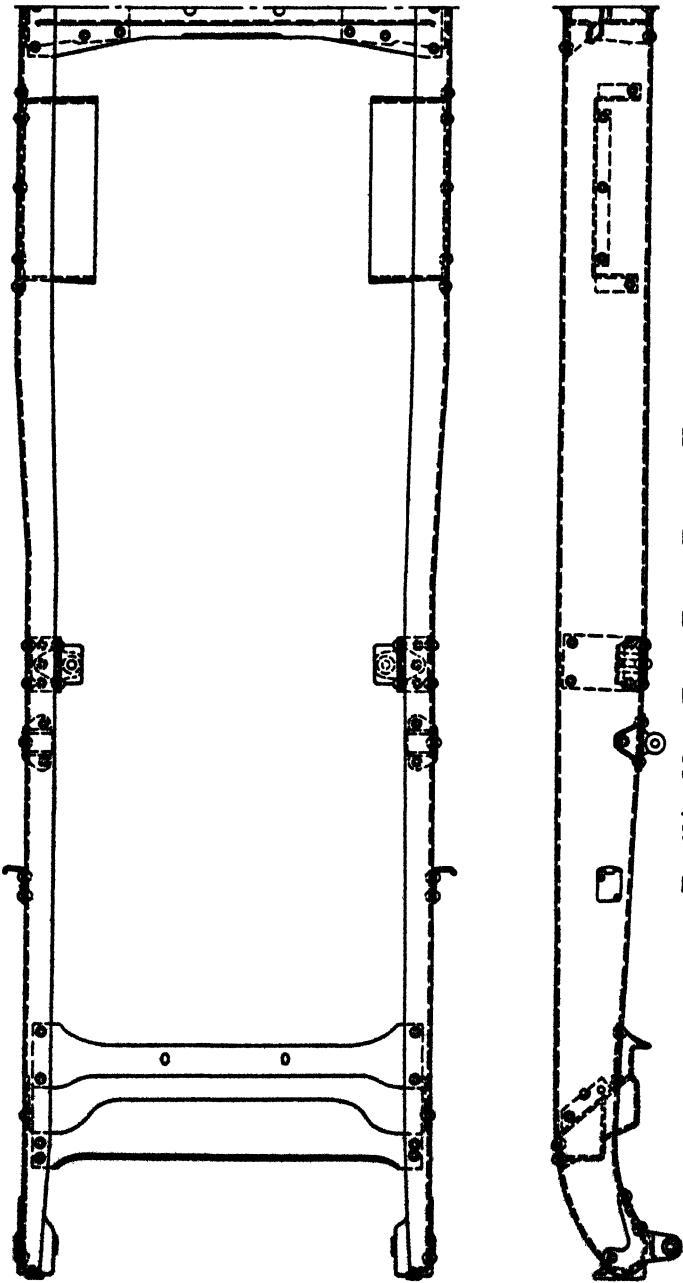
A.—MOTOR-TRUCK FRAME, FORWARD HALF.
